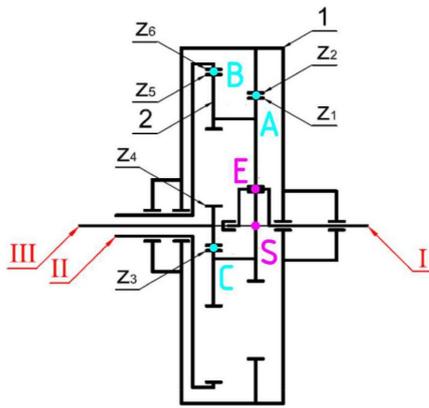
Principal scheme of double-output gear mechanism: I – input shaft, II – output shaft, III – output shaft, S – central axis, E – eccentricity, z_1-z_6 – numbers of teeth, 1 – frame, 2 – gear wheel
